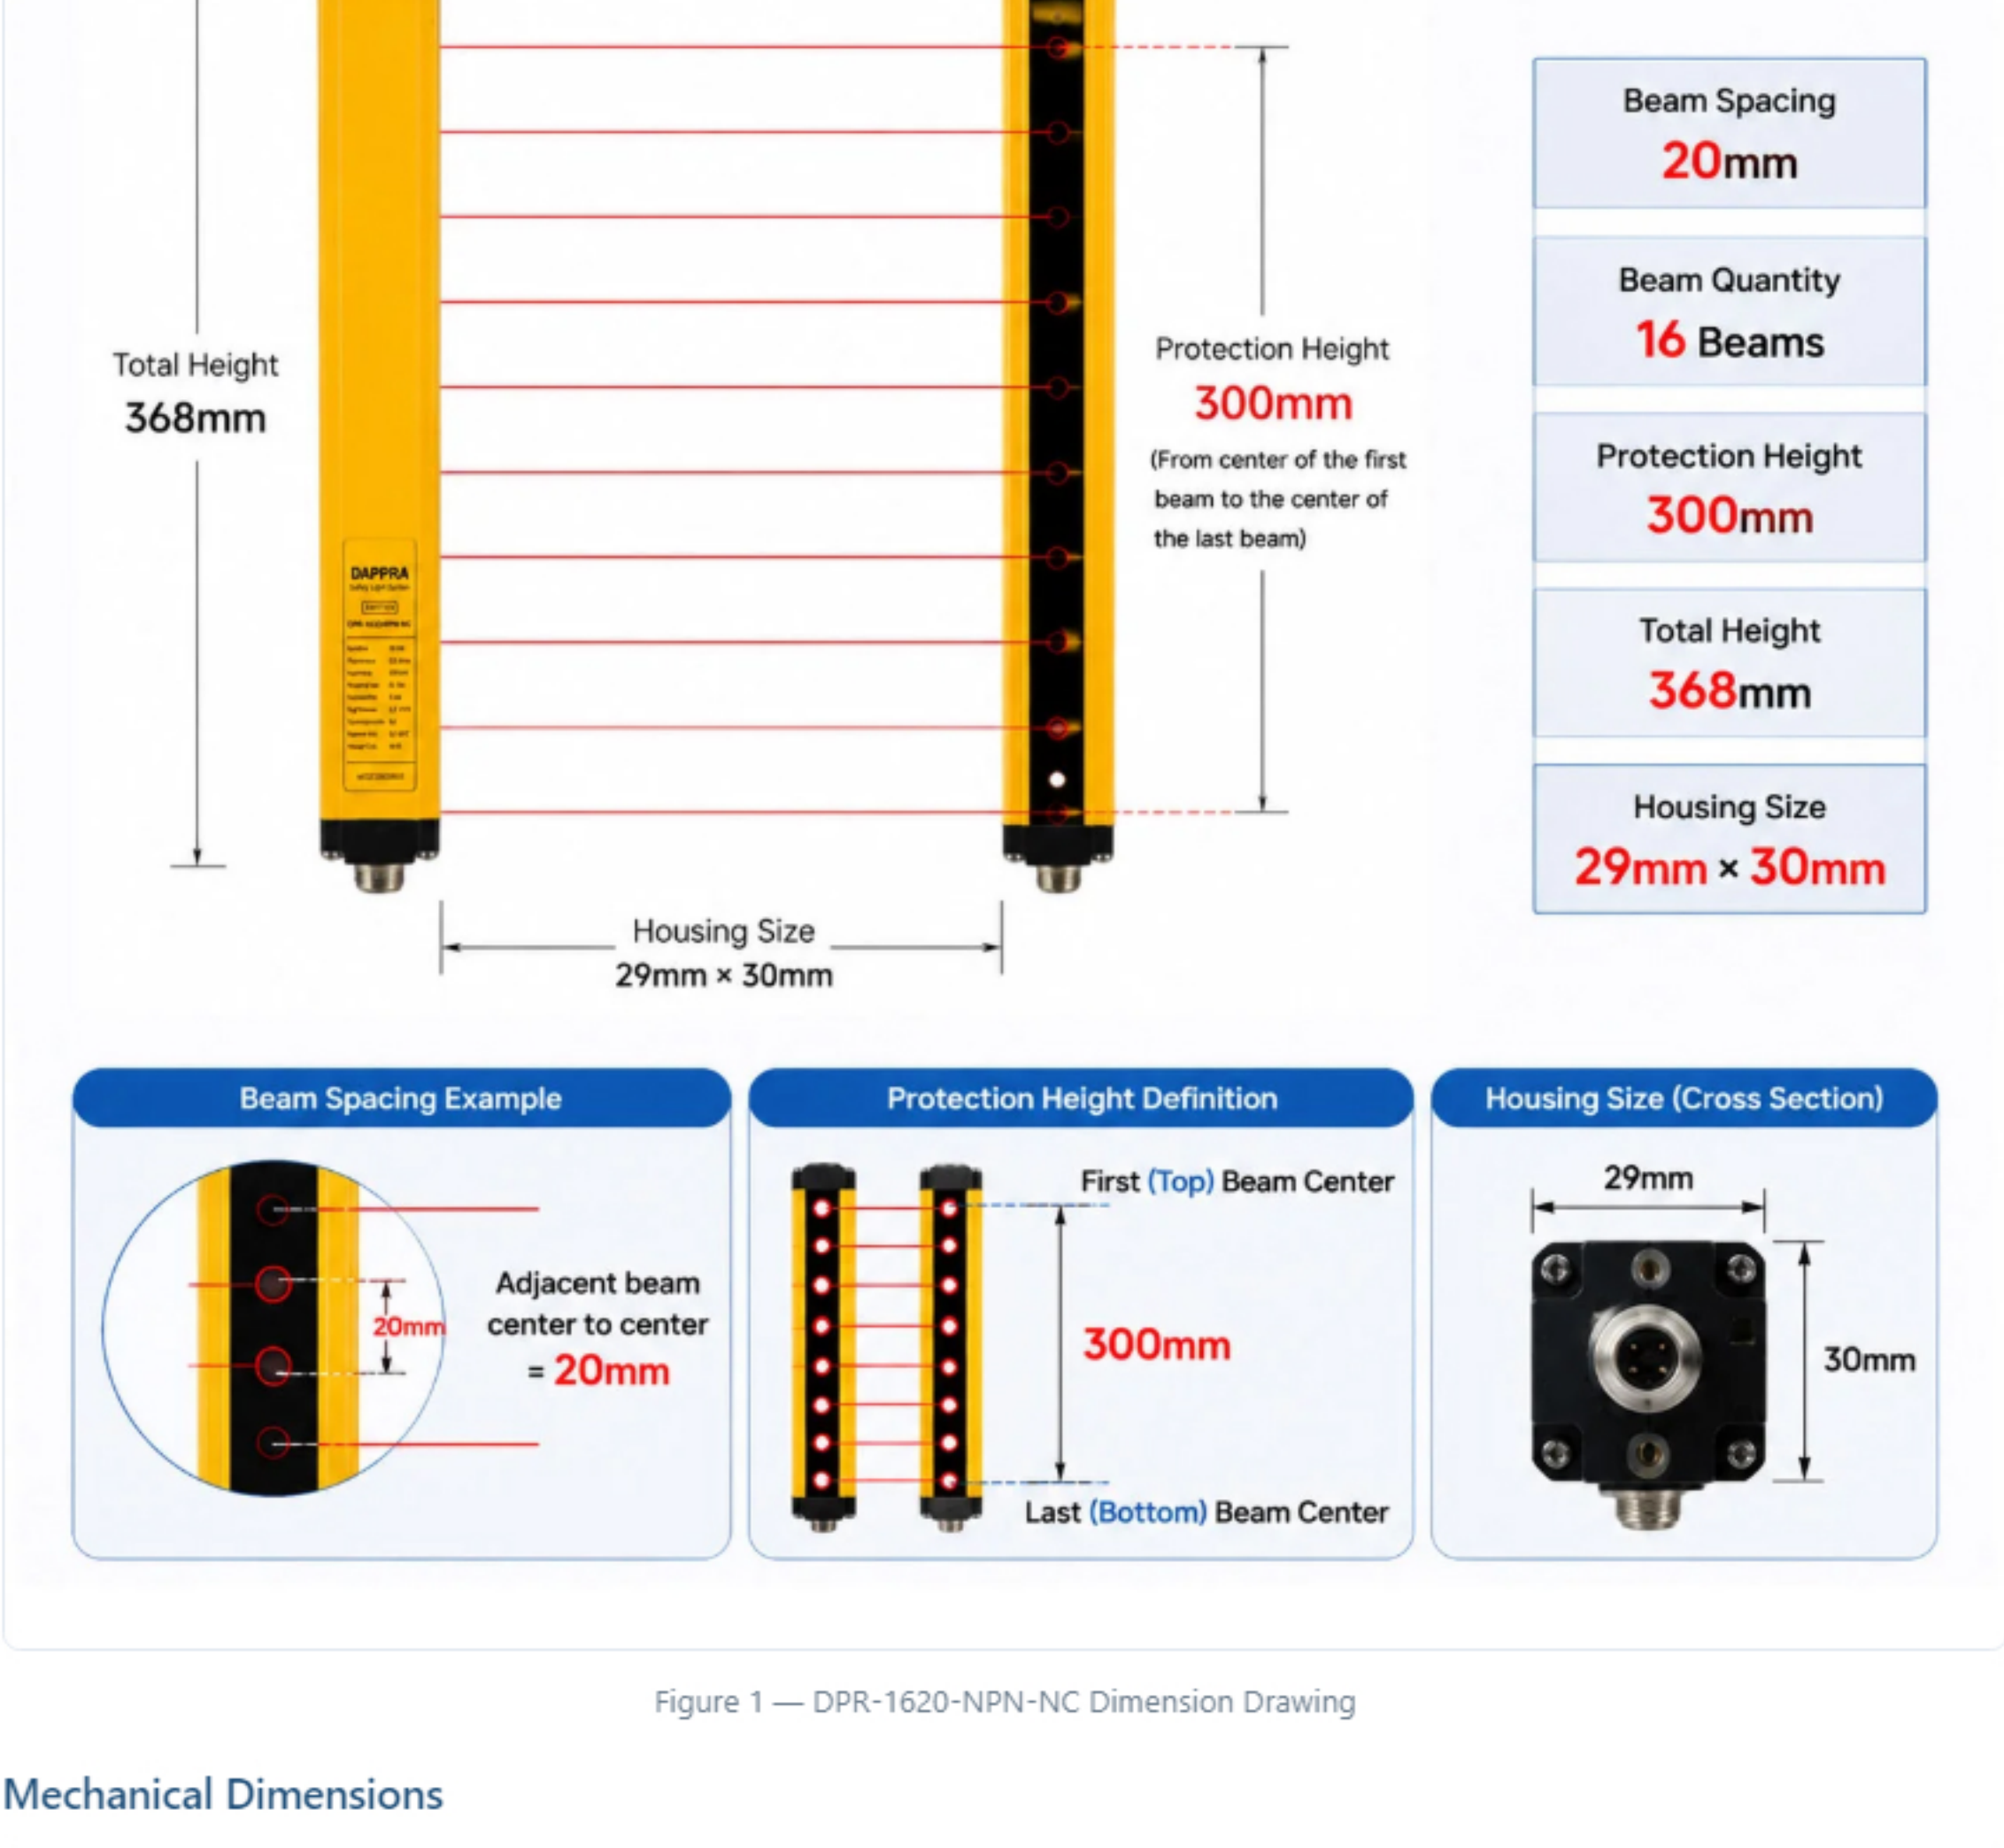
DPR-1620-NPN-NC Dimension Drawing
